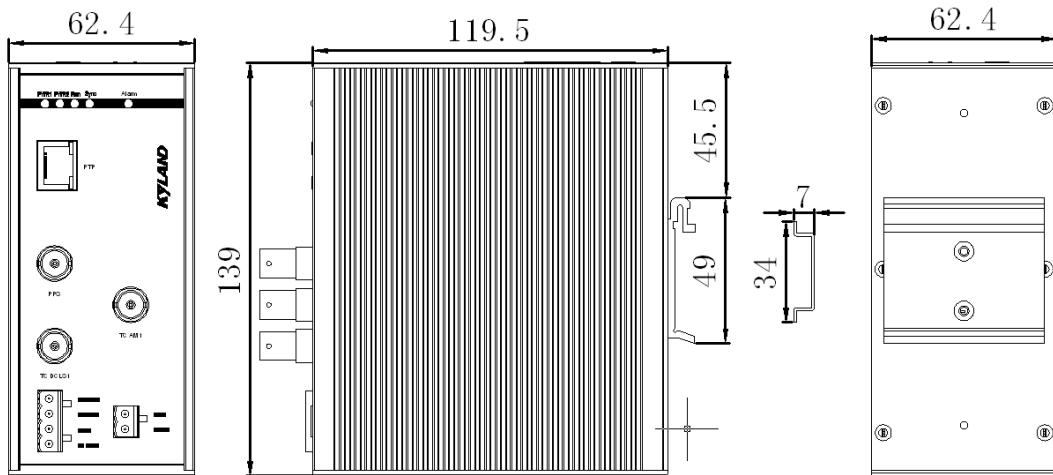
DIN-Rail Mounting Dimension (Unit: mm)
